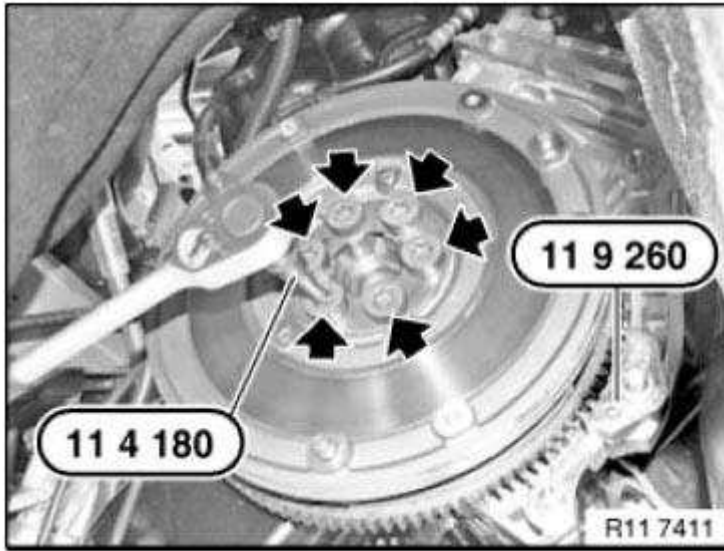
Removing Flywheel Bolts Using Special Tool 11 4 180
